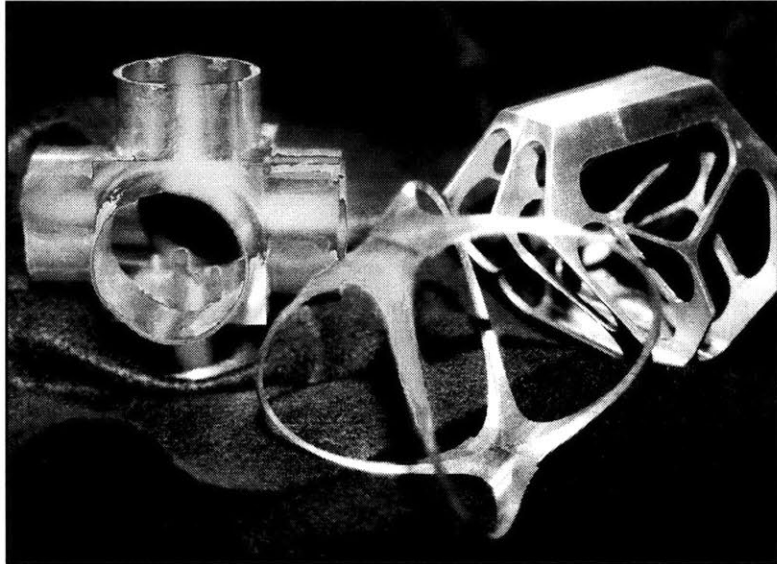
Photograph of sample parts machined using encapsulation fixturing
